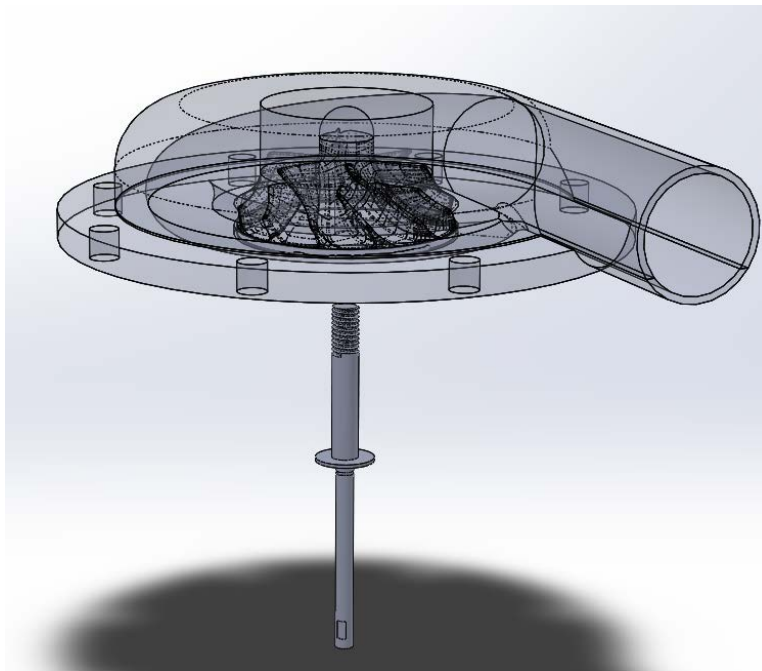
Assembly Model of Volute, Impeller, and Motor Shaft
